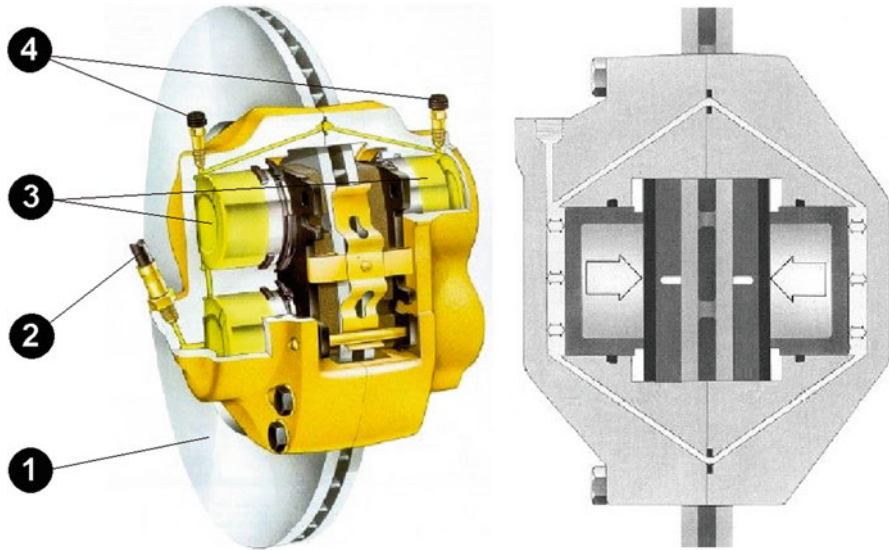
Fixed caliper: 1 brake disk, 2 hydraulic connection, 3 brake piston, 4 bleeding screws
